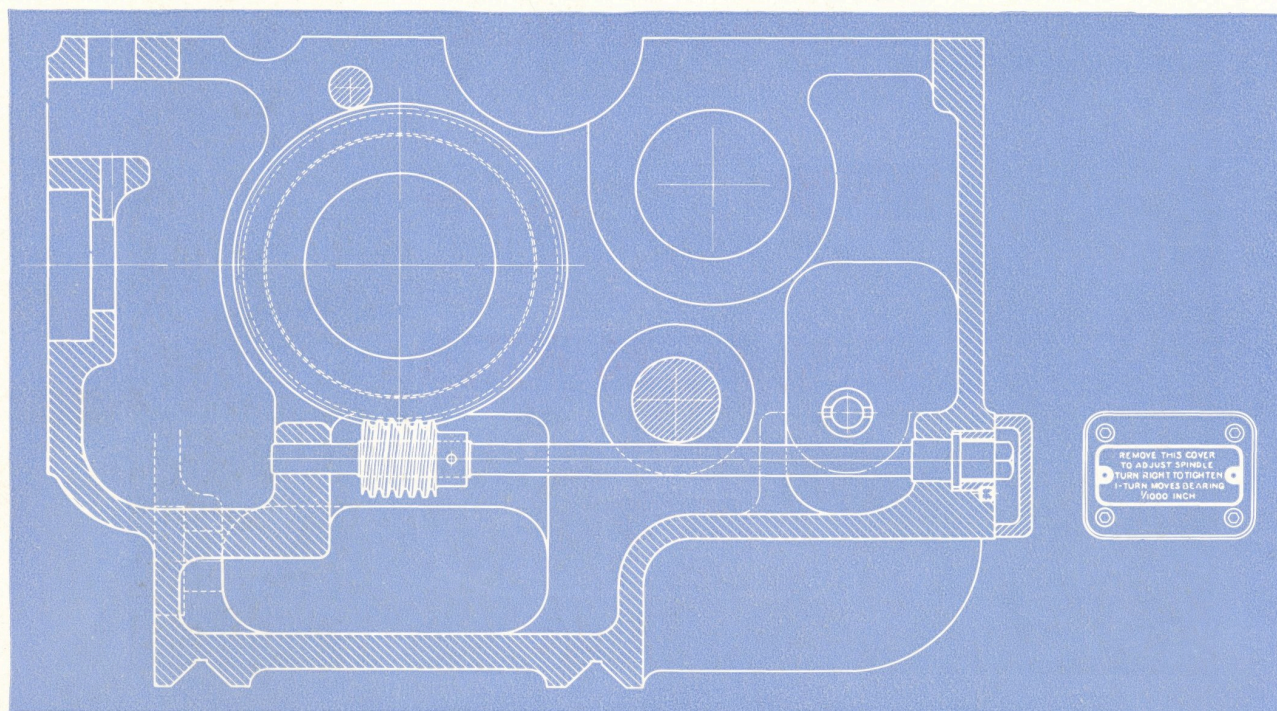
, Diagram showing means for adjusting Spindle Bearings
